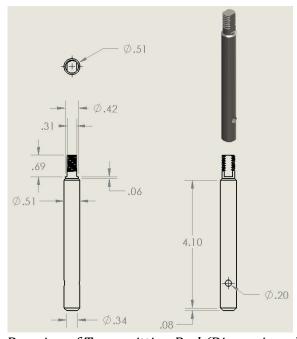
Drawing of Transmitting Rod (Dimensioned in Inches)
